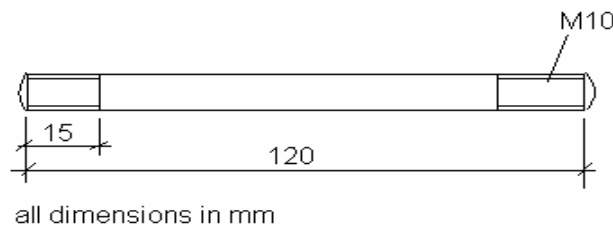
The high temperature tensile test specimen for the Gleeble 1500™ machine
